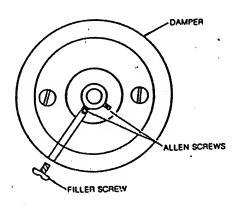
DAMPER ASSEMBLY Screw Locations
